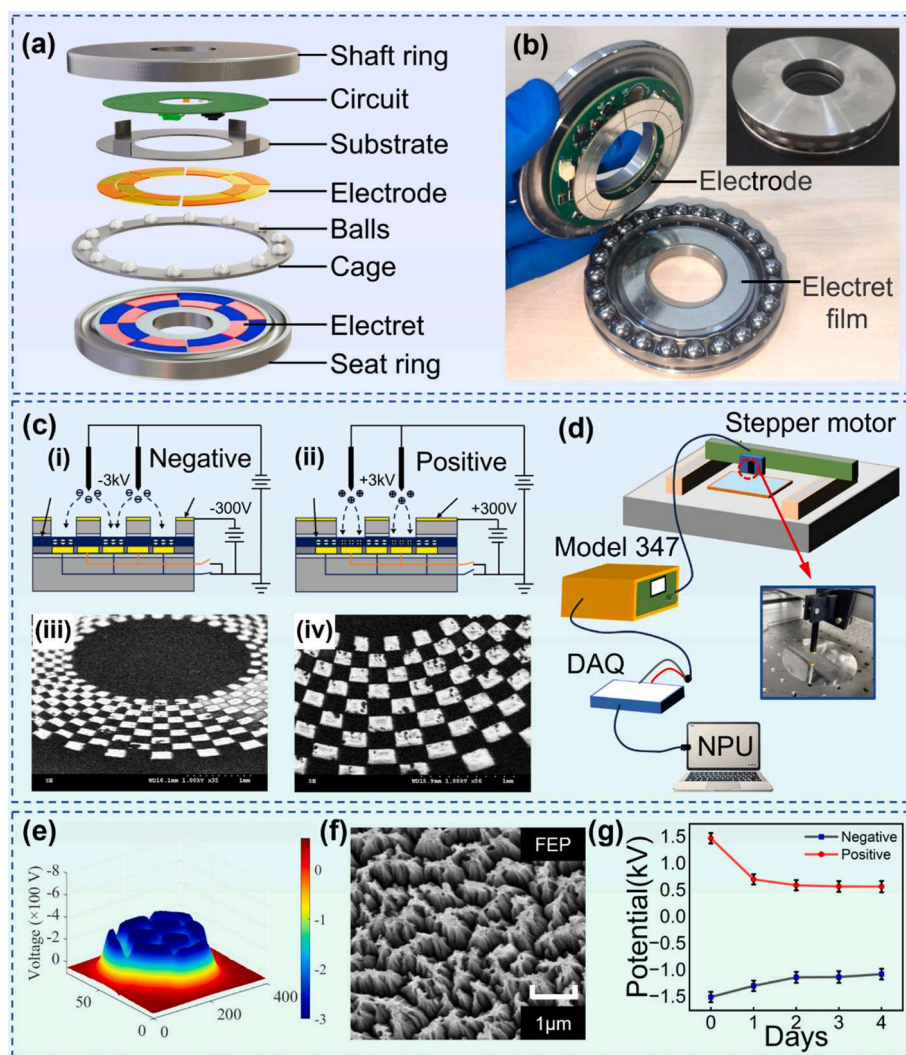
Fabrication and assembly of the STBB. (a) Exploded view of the STBB, showing the shaft ring, sampling circuit, electret, electrode, and related components. (b) Photograph of the assembled STBB, highlighting the electrode and electret film. (c) Charging process of the electret film: i) negative discharge, ii) positive discharge, iii) SEM image of negatively charged regions, and iv) magnified SEM image of the negatively charged regions. (d) Schematic diagram of the 3D surface potential scanning system utilizing the Trek Model 347 probe. (e) 3D potential distribution map of the negatively charged electret film. (f) SEM image of the FEP surface microstructure. (g) Stability of the surface potential on bipolar-charged electret films during 96 h of static storage at room temperature.
